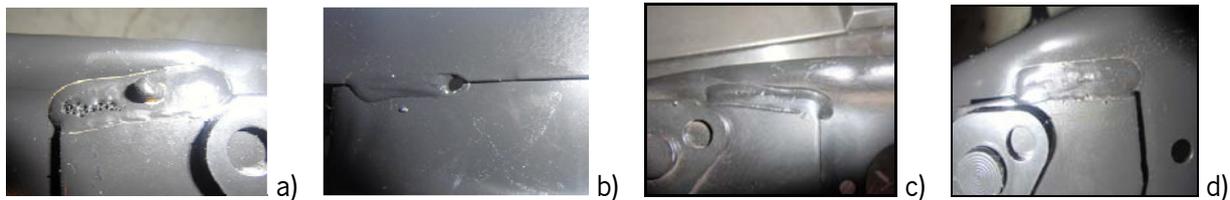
Types of defects: a) porous welding seam, b) leaked welding seam, c) deviated welding seam, d) lack of paint.
